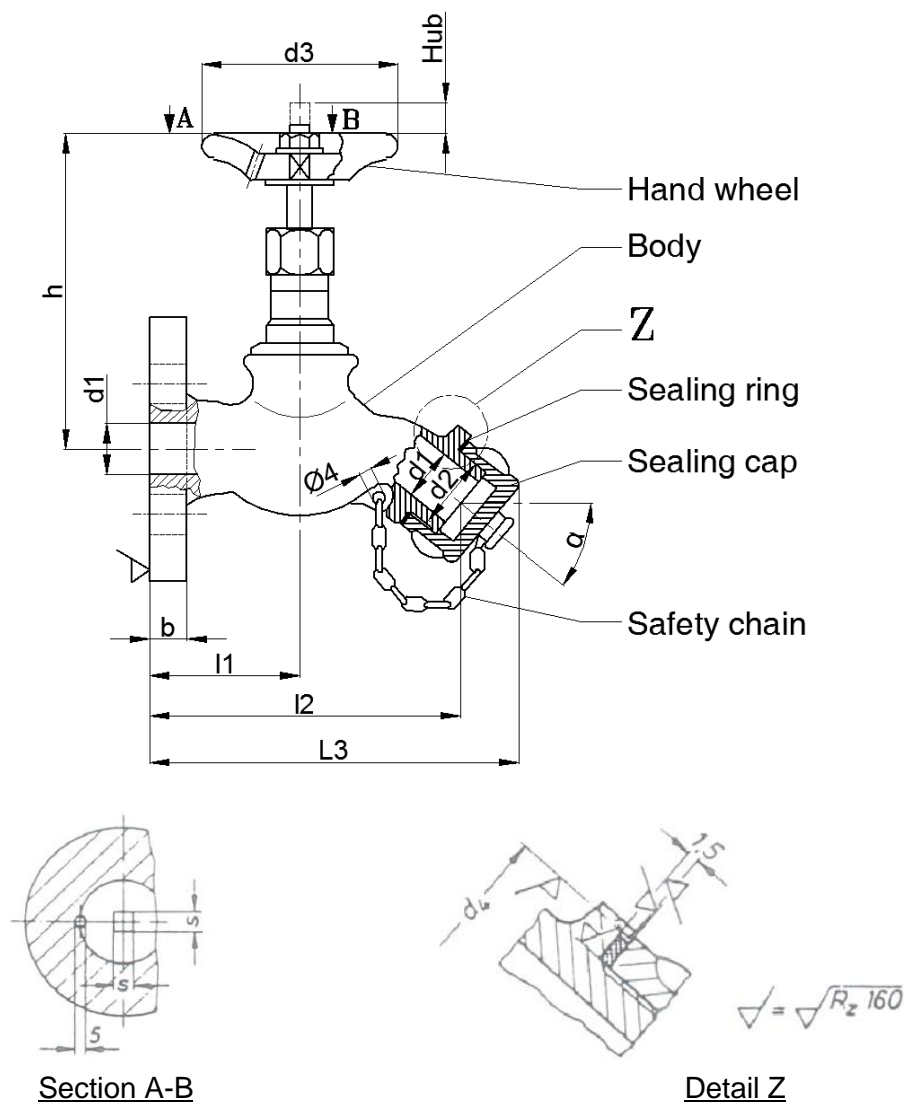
Overall view of copper alloy outlet valve with dimensional parameters
